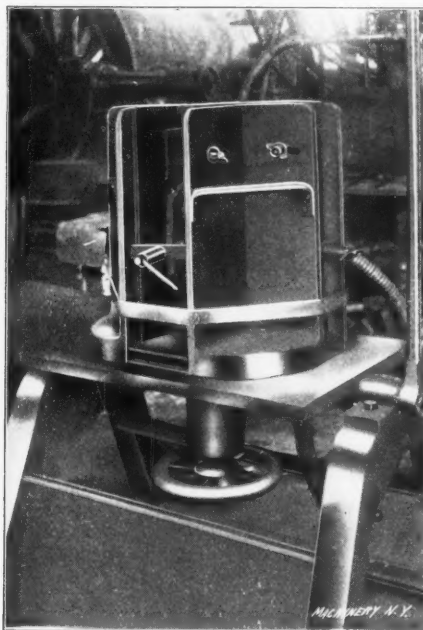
Mold ready for Babbitting a Four-bar Guide Cross-head
